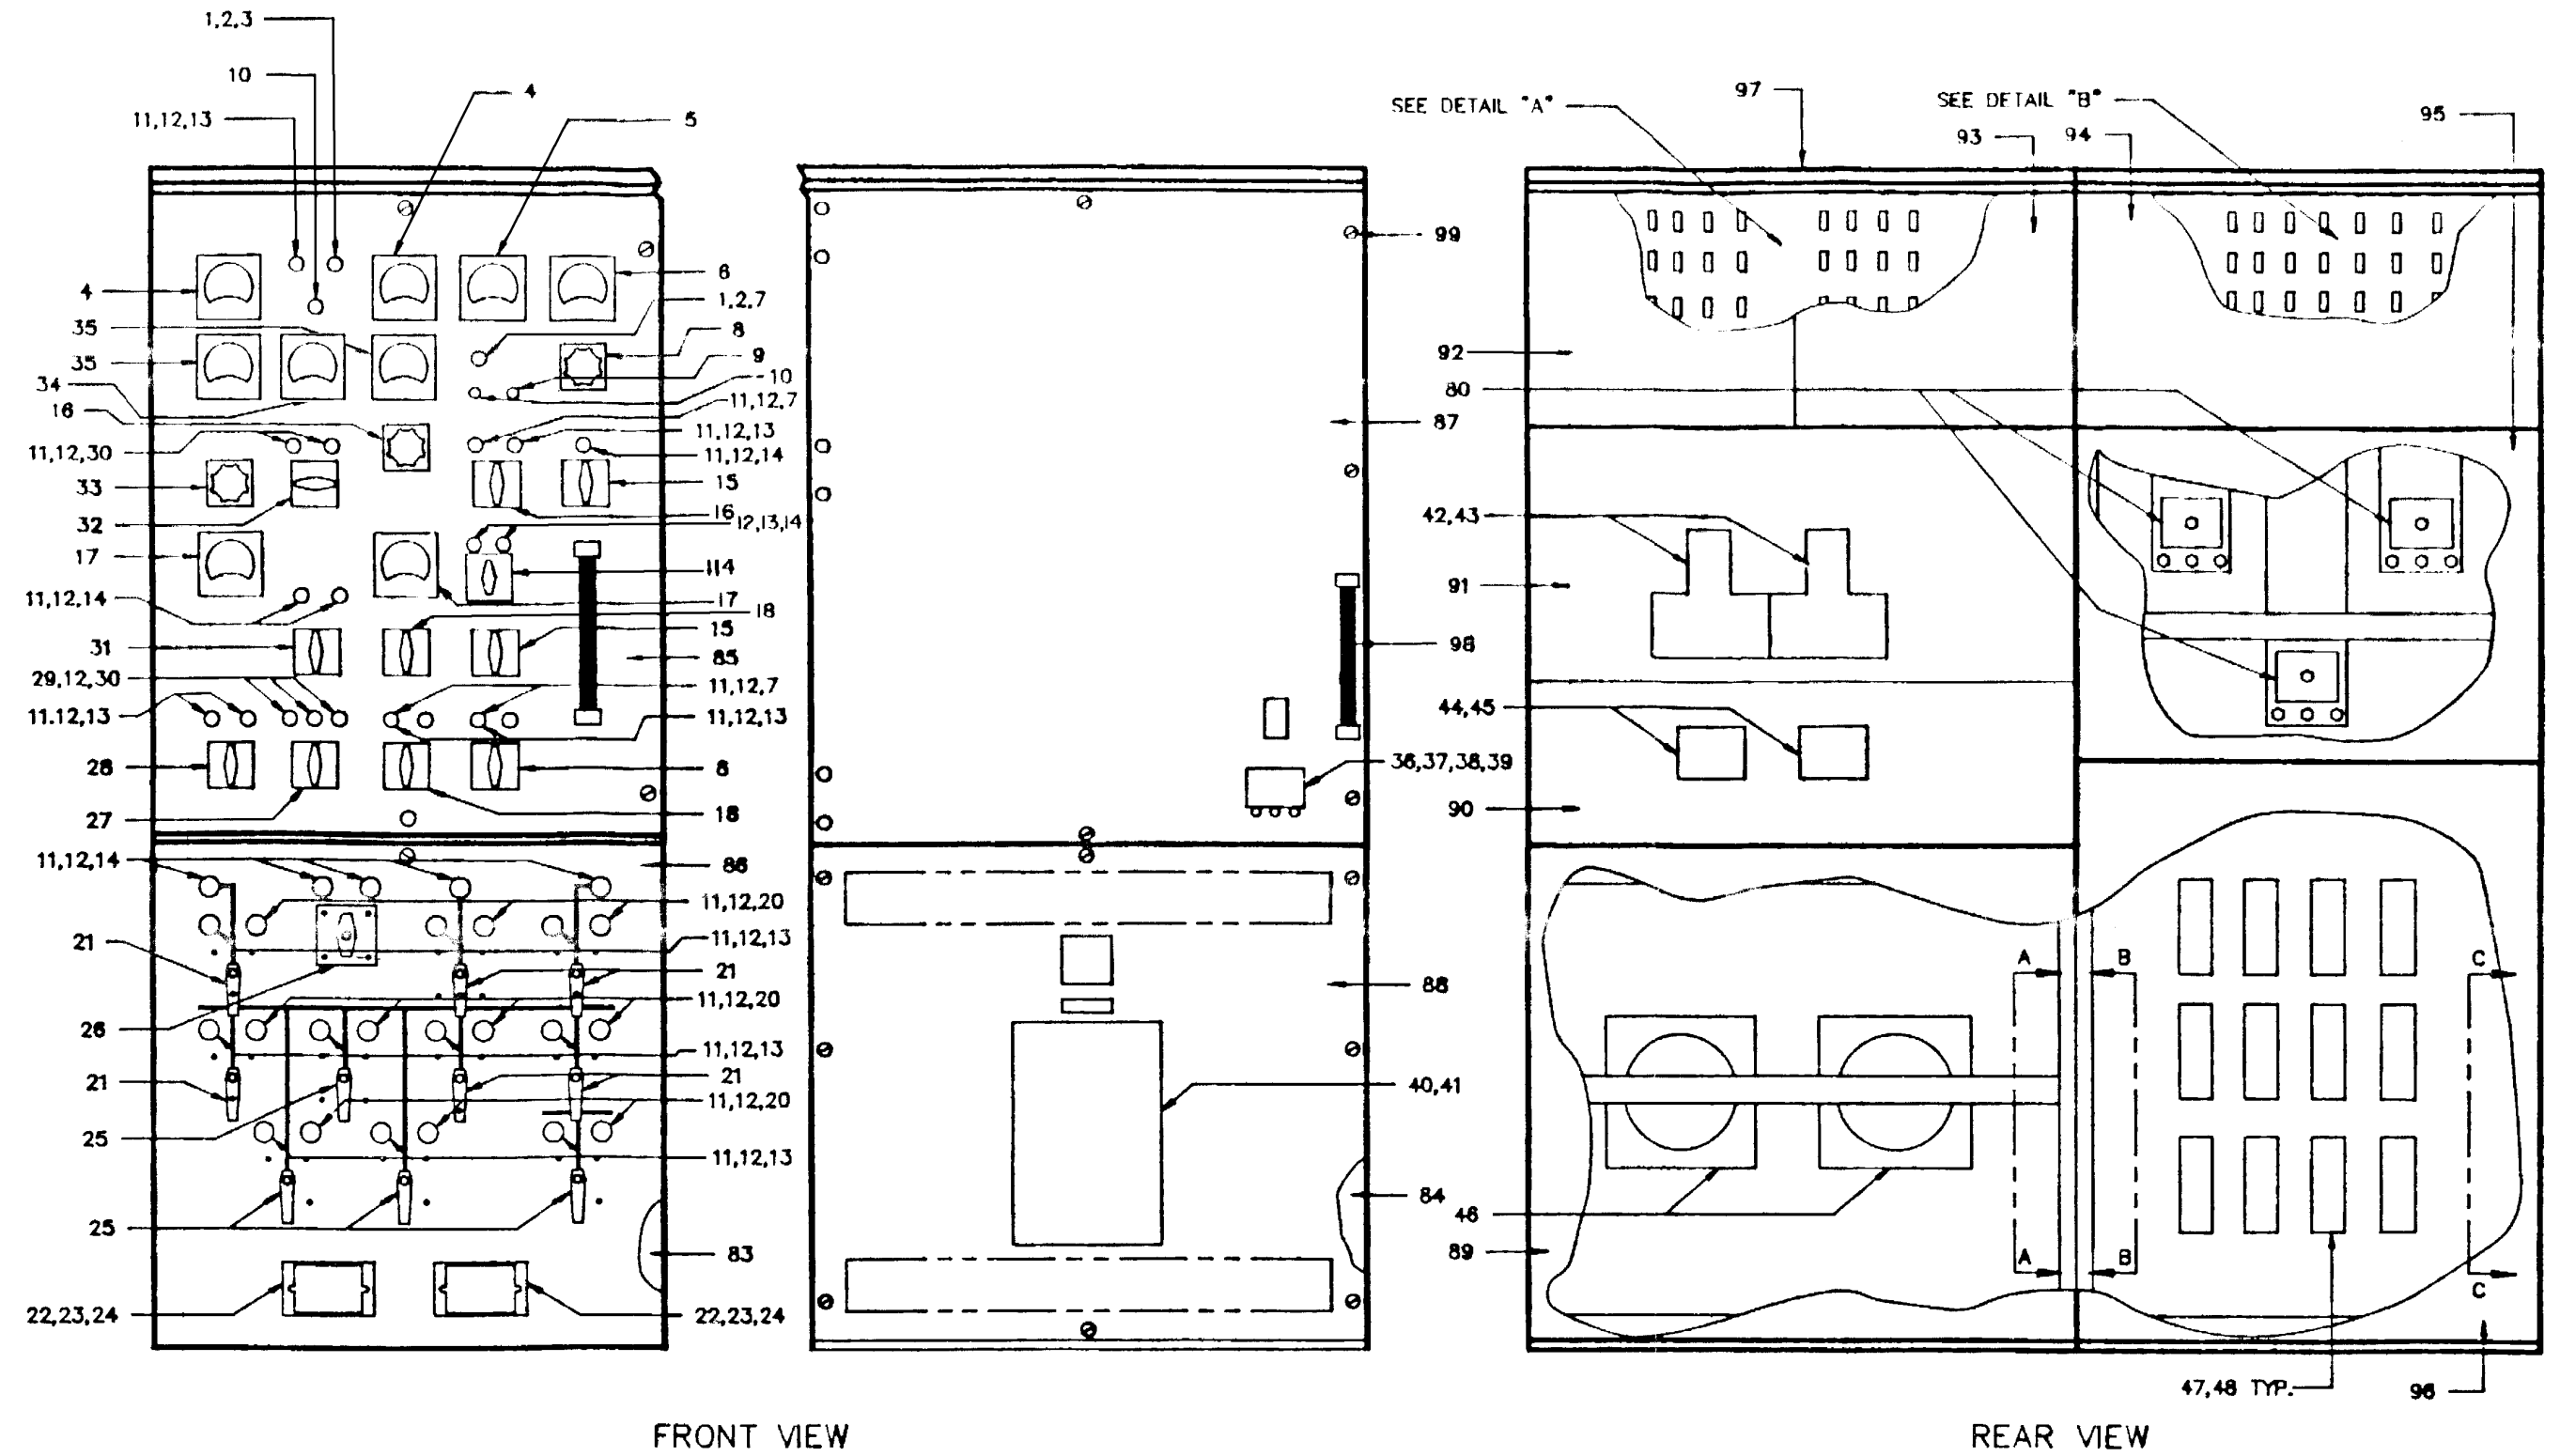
3SG Switchboard Assembly (Sheet 1 of 3)
